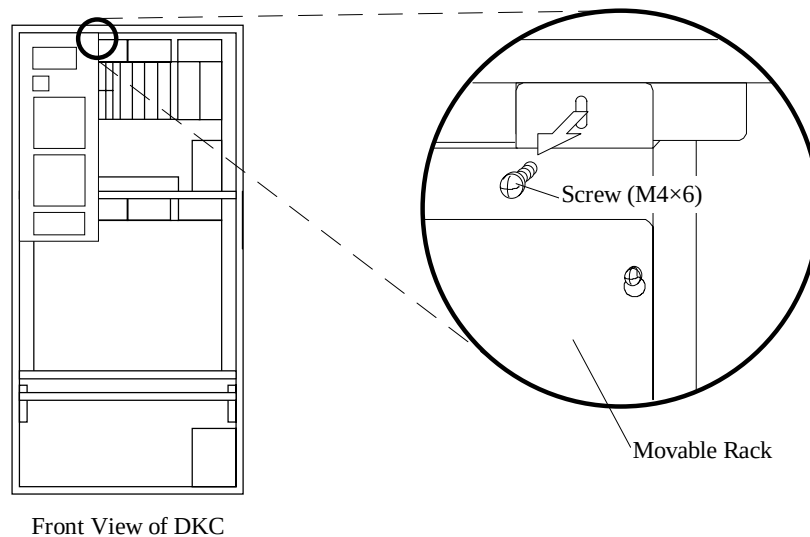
Removal of Screw for Transporting the Movable Rack
